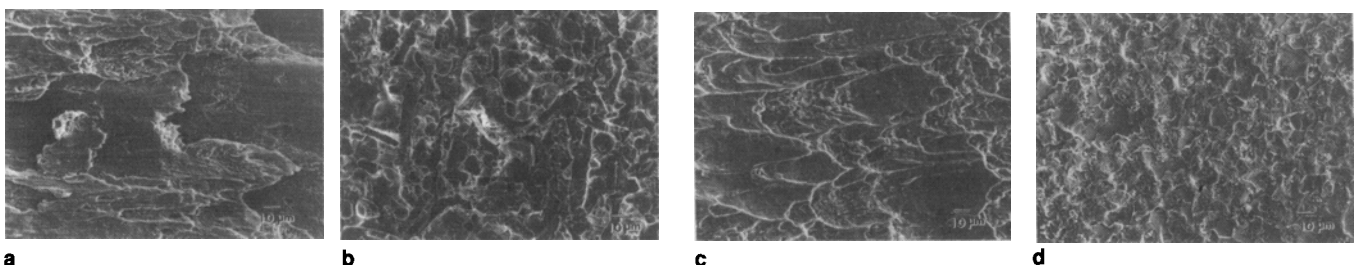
The fracture surfaces of Sn-Ag/Cu joints soldered at various conditions and tested in shear: (a) baseline, (b) higher peak T, (c) slower cooling, and (d) longer dwell time (i.e., A,B,C, and D in Table II).
